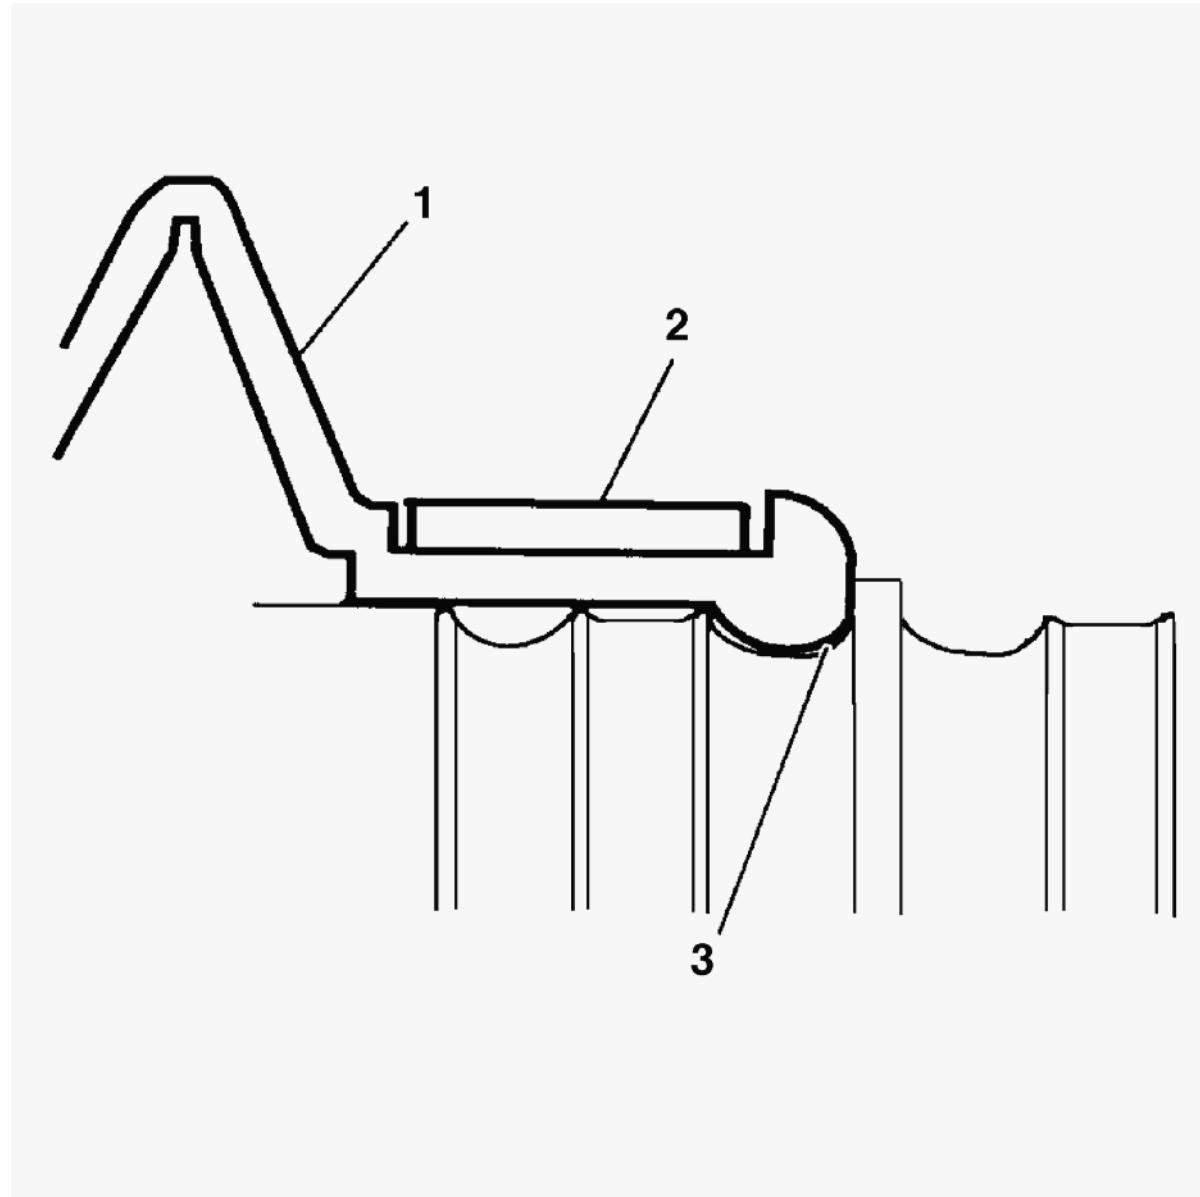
Positioning Small End Of Joint Seal Into Joint Seal Groove
